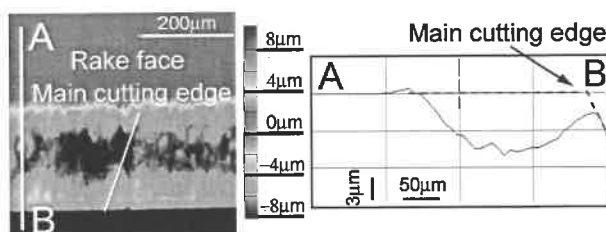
Rake face of the cutting tool with nano/micro-textured surface after cutting for 300 m
